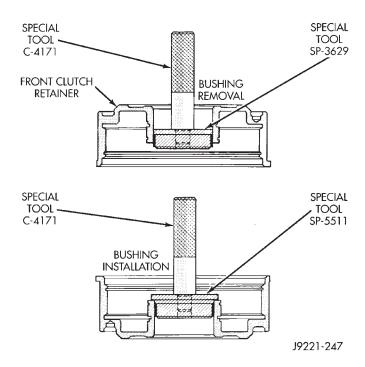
Front Clutch Retainer Bushing Replacement—46RH
